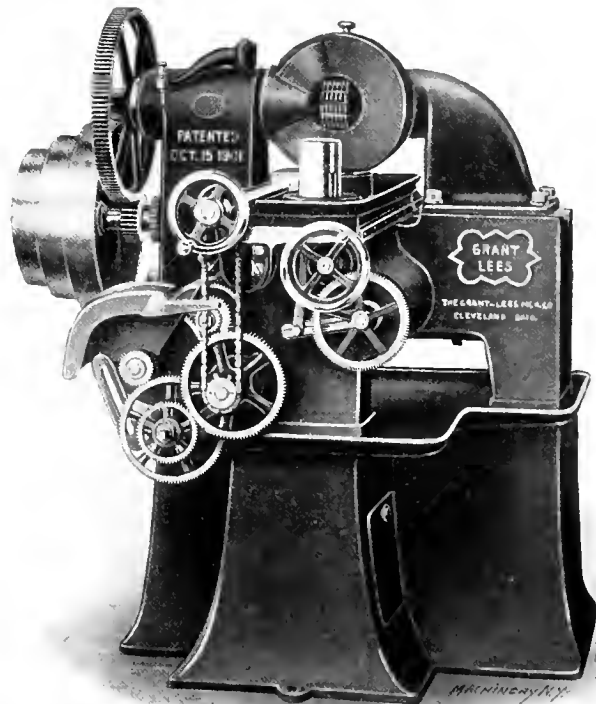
Grant-Lees Gear Generating Machine. Front View.
